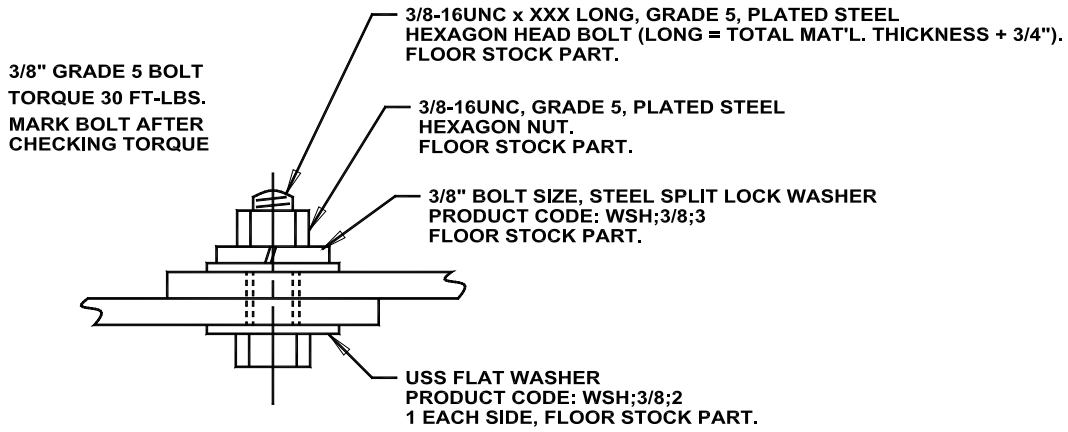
3/8" FASTENERS (ALTERNATE 1)
